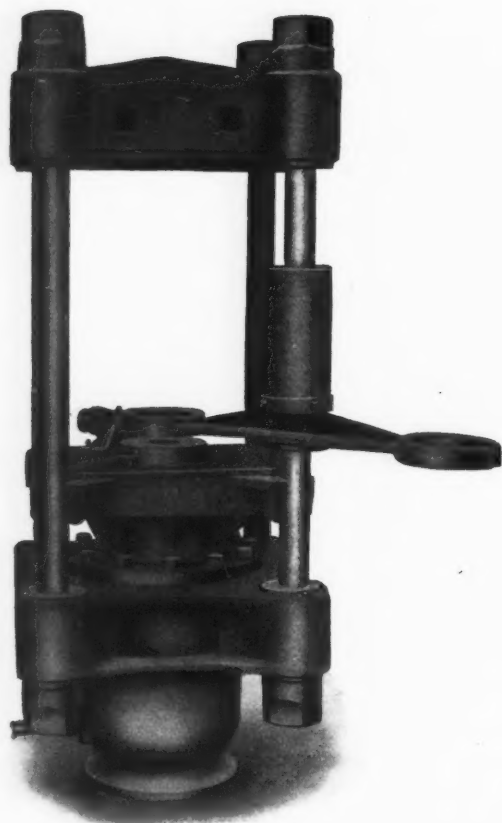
Shrapnel Shell Nosing Press made by the Hydraulic Press Mfg. Co.
